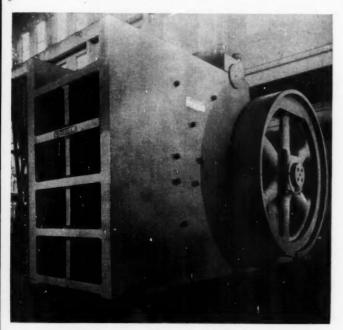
Heavy rigid structure for 42 by 48 in. jaw crusher required stress relieving before cooling to prevent spontaneous brittle fracture during cooling. Side plates are 6 in. thick.
